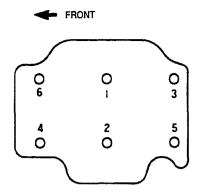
CYLINDER HEAD BOLT TIGHTENING SEQUENCE
